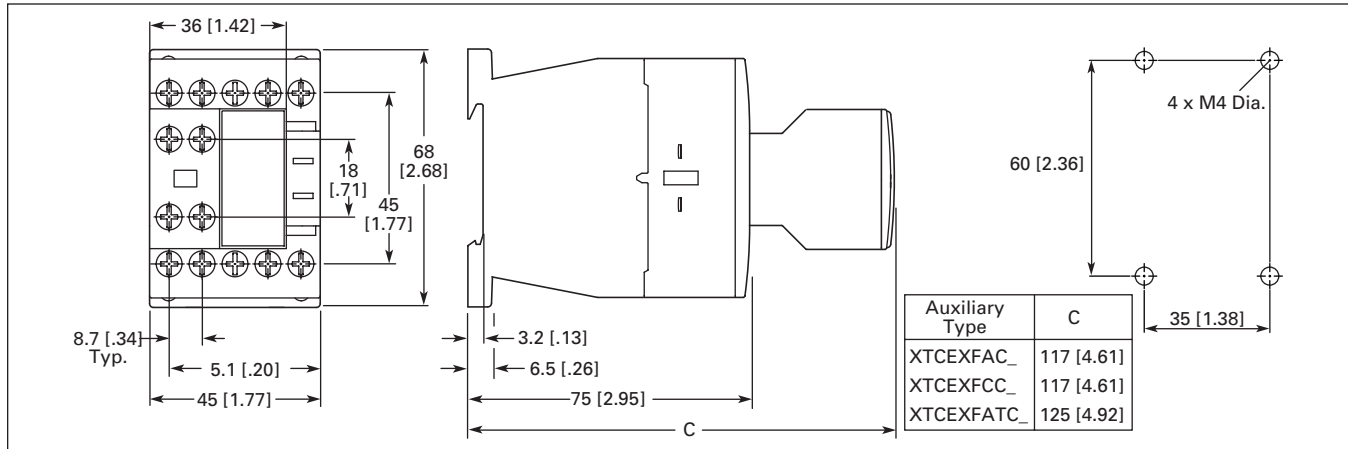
Frame B, XTCE007B – XTCE015B Contactors with Screw Terminals (7 – 15A) — Approximate Dimensions in mm [in]
